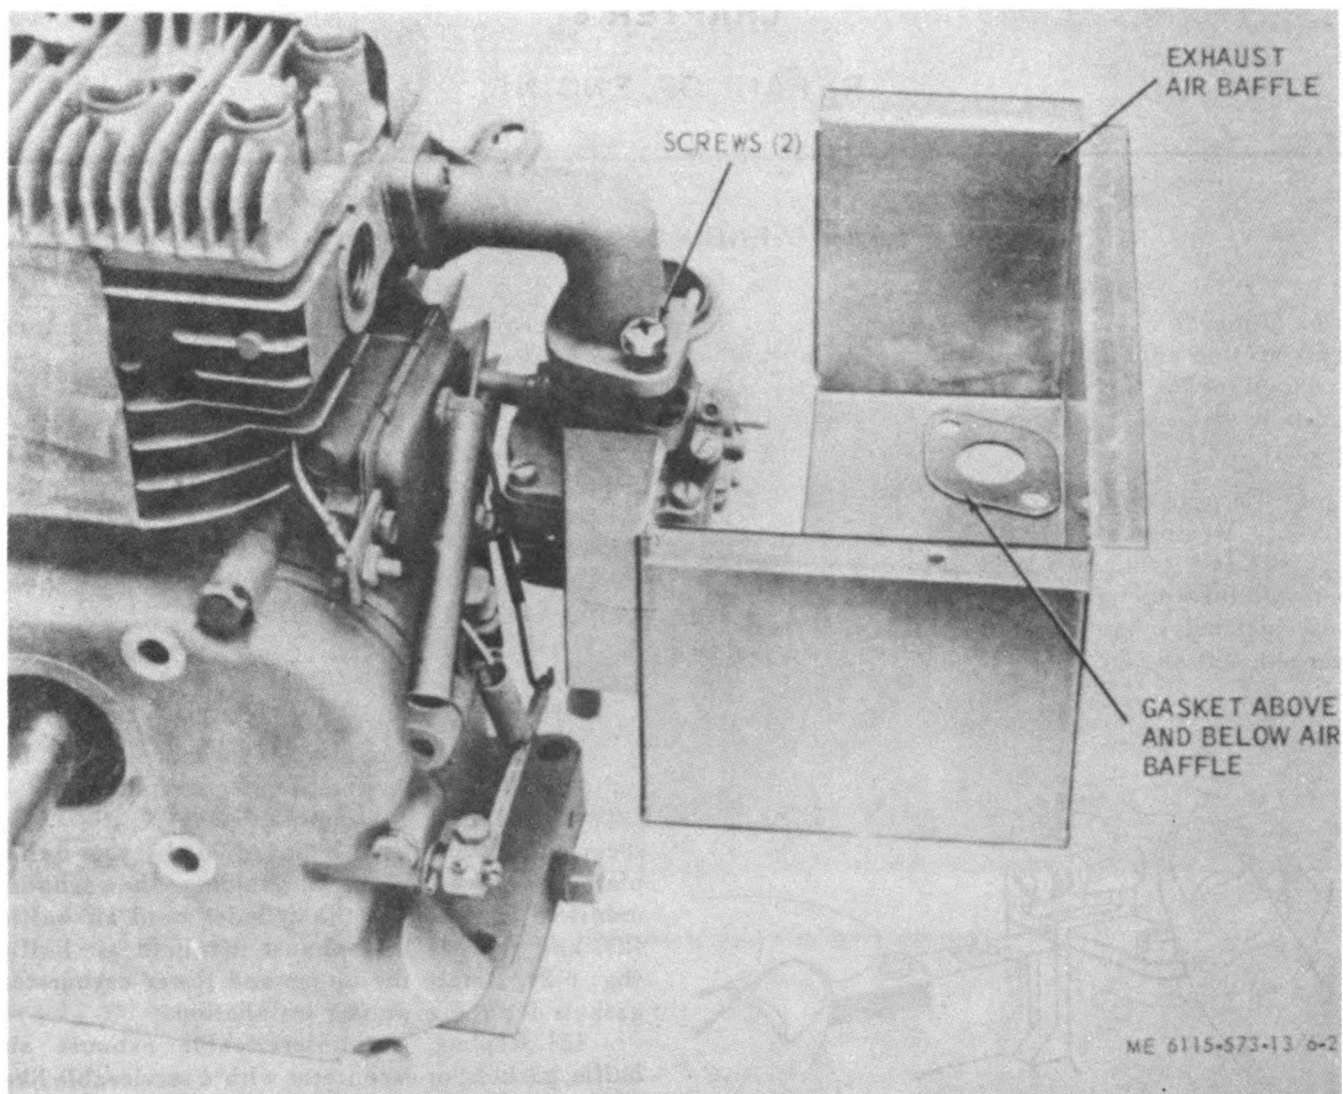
Carburetor and exhaust air baffle, removal and installation.
